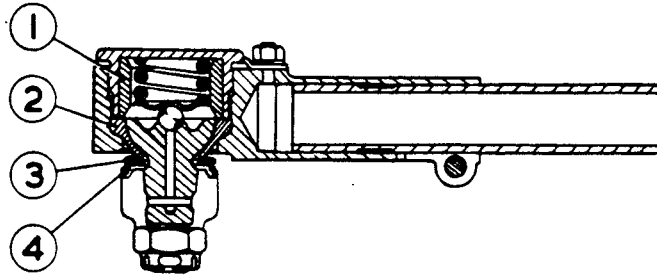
SECTION-SOCKET-SIDE STEERING TUBE FRONT END
